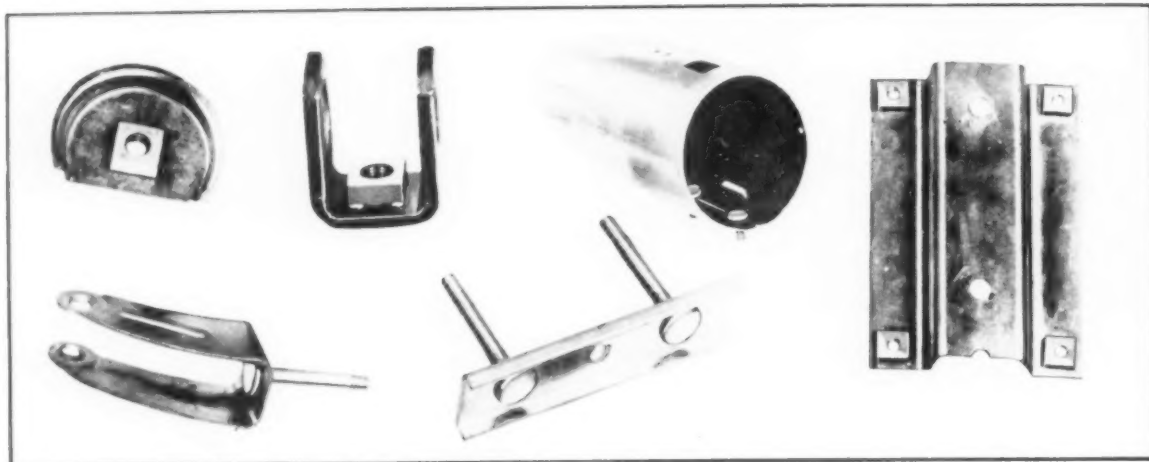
(above) Typical application of projection-welded fasteners. The joint produced is often stronger than the body of the screw and is virtually free of distortion or discoloration.
